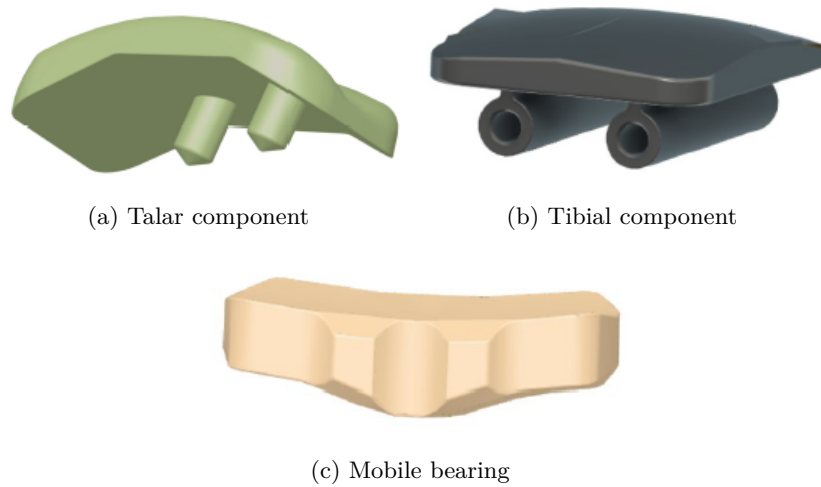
Exploded view of Bologna-Oxford BOX TAR
